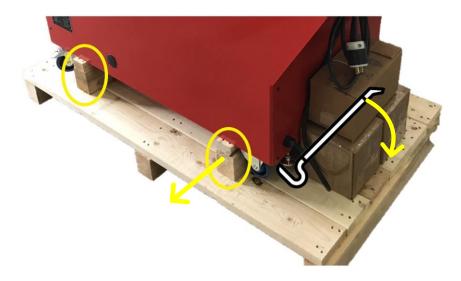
Stack blocks to remove prior to rolling machine off ramp.
